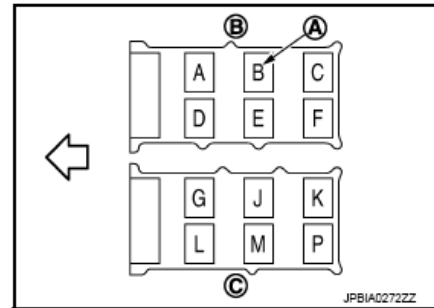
Identifying Stamp Marks On Camshaft Bracket
